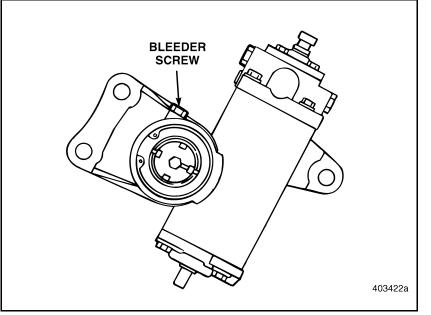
Sheppard M90 Steering Gear Bleeder Screw Location
